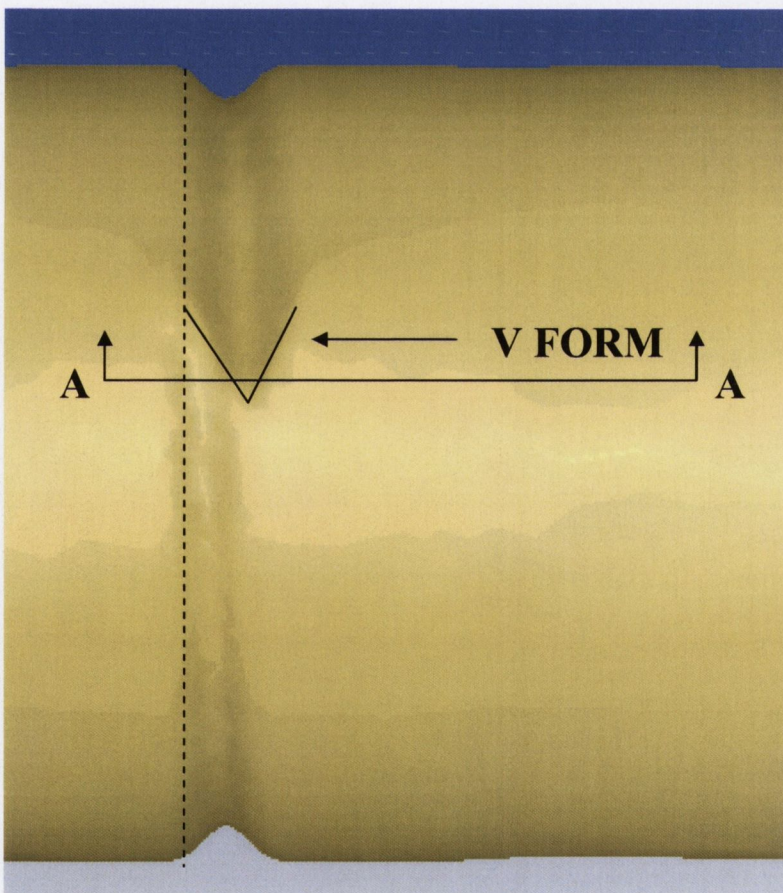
Illustration of the V form shape produced by a die after 180° workpiece rotation.
